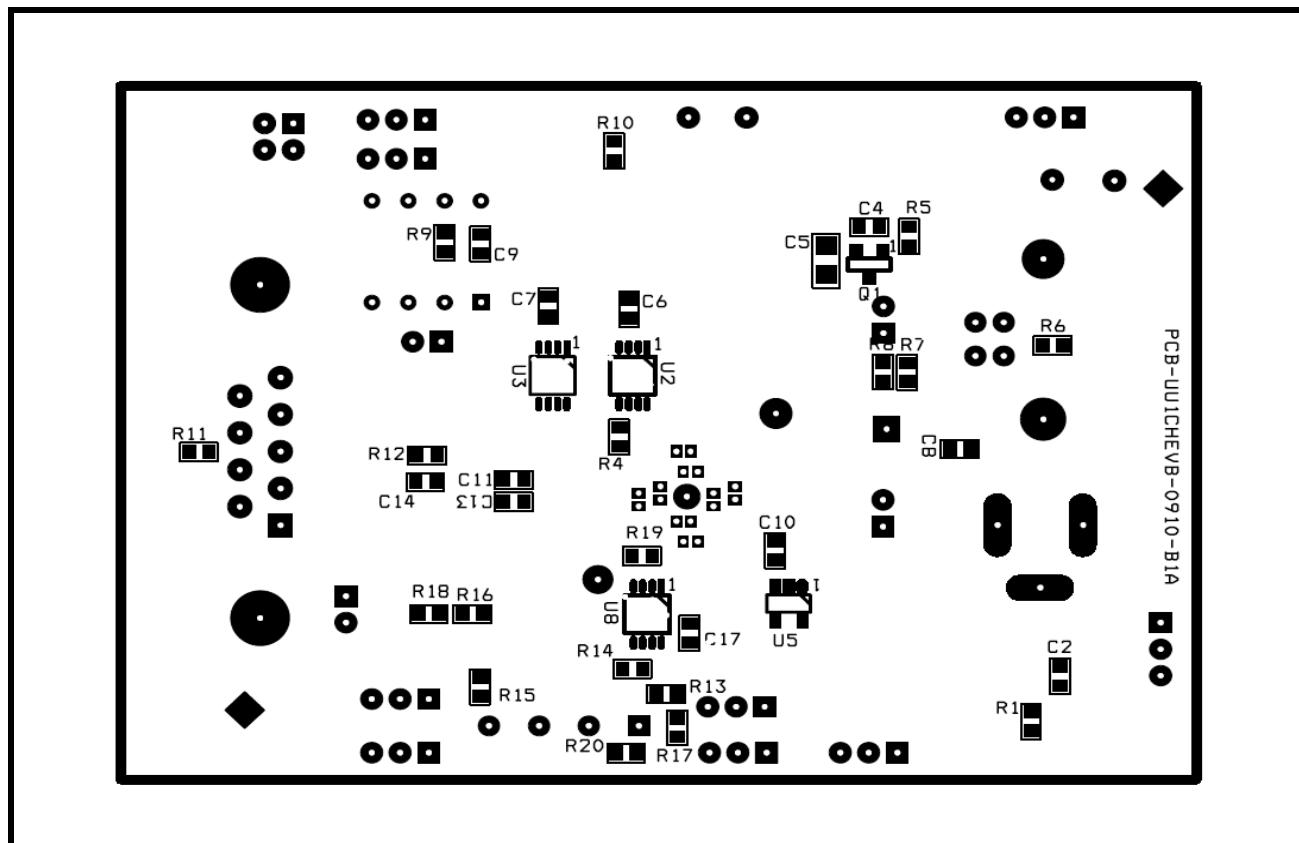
shows a bottom view of XR21V1410 evaluation board layout.
